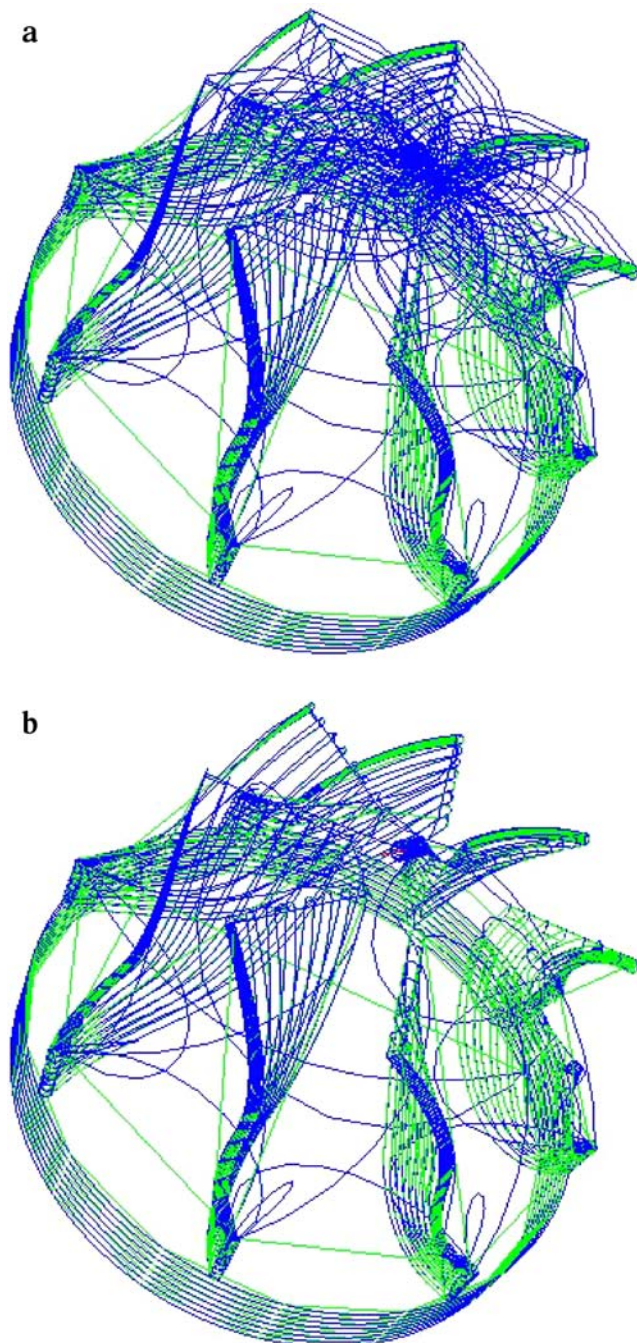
a Conventional tool path for impeller surface. The path length is 30,707 mm. b Optimized tool path for the impeller. The path length is 25,129.4 mm
